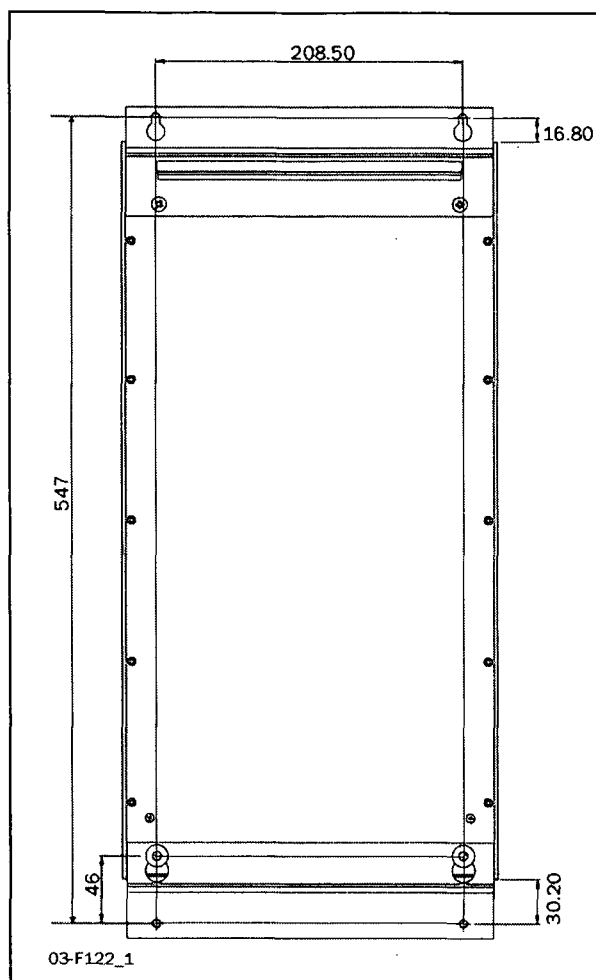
Hole pattern for MSF-170 to MSF-250 with upper mounting bracket instead of DIN rail.
